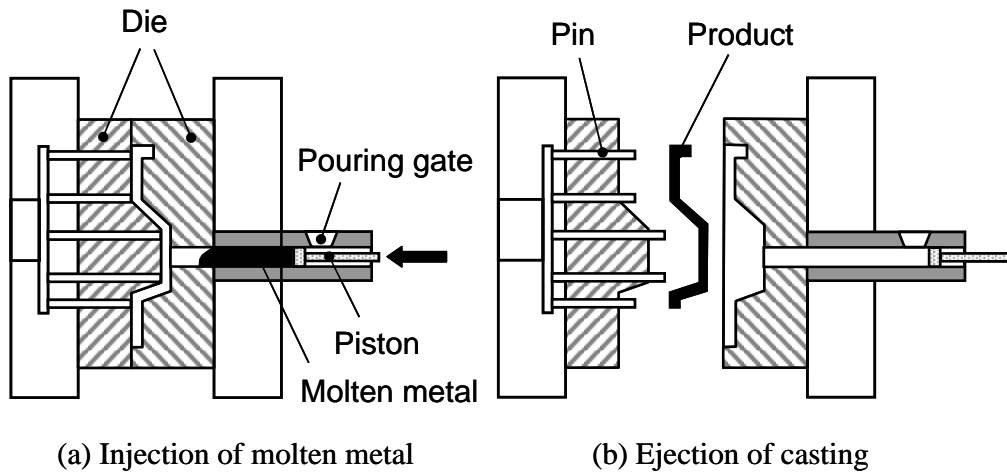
Schematic of die casting machine (cold chamber machine)
